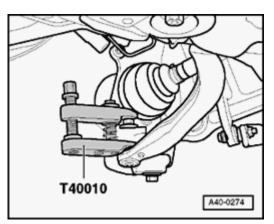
Separating Guide Link Joint Pin From Tapered Seat Using Ball Joint Puller T40010 Courtesy of VOLKSWAGEN UNITED STATES, INC.
